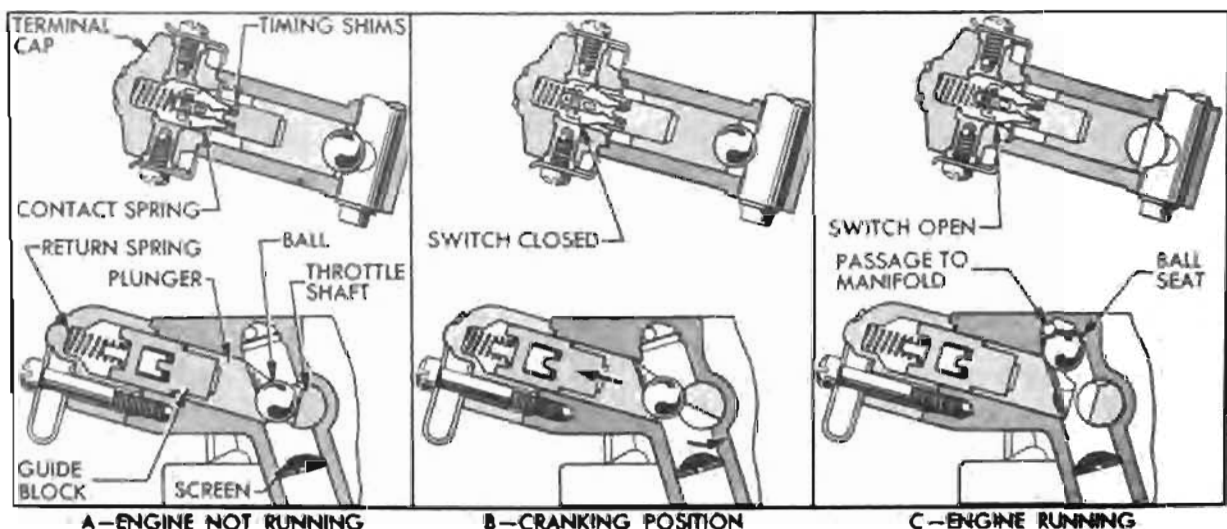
Carter Accelerator Vacuum Switch Operation
